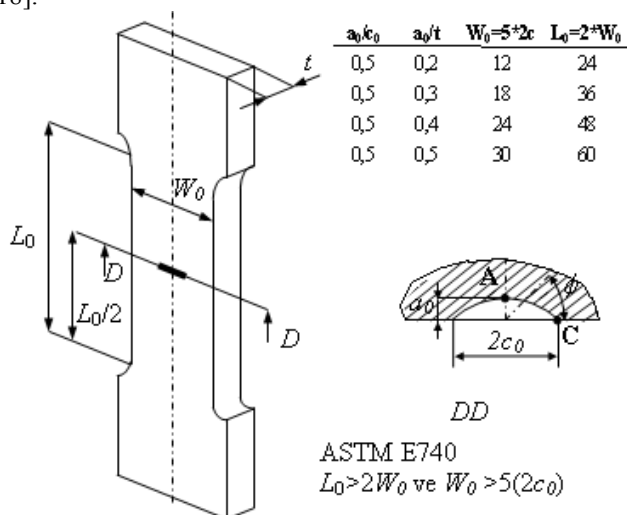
The sketch of the axial fatigue test specimen geometry with semi-elliptical surface crack
